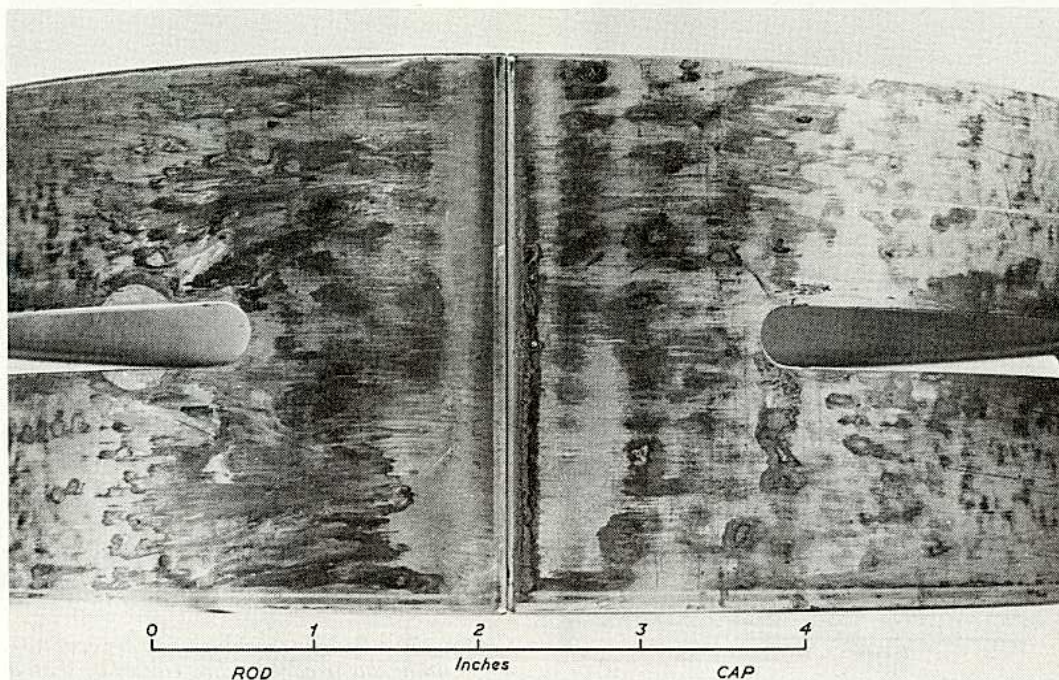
Fretting damage on back of bearing due to inadequate interference
